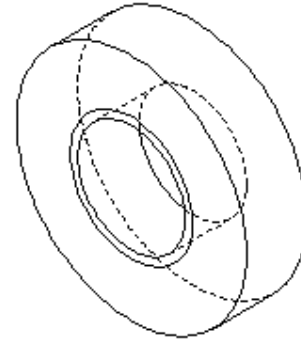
CAD drawing for probe attachment used to measure hardness of frozen dessert prototypes.
